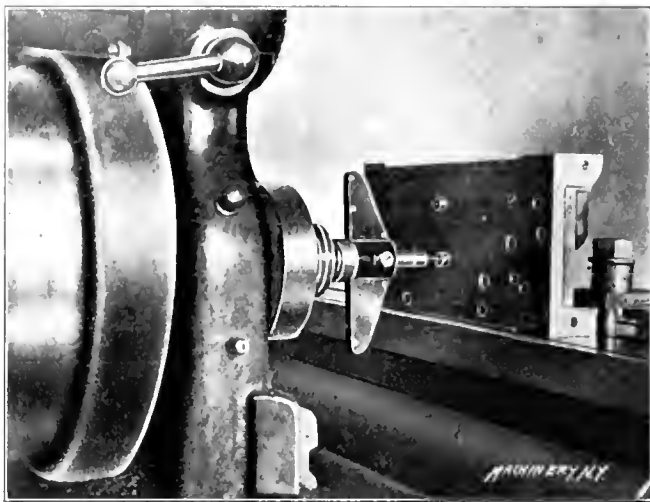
Use of the Indicator in the Horizontal Milling Machine.
